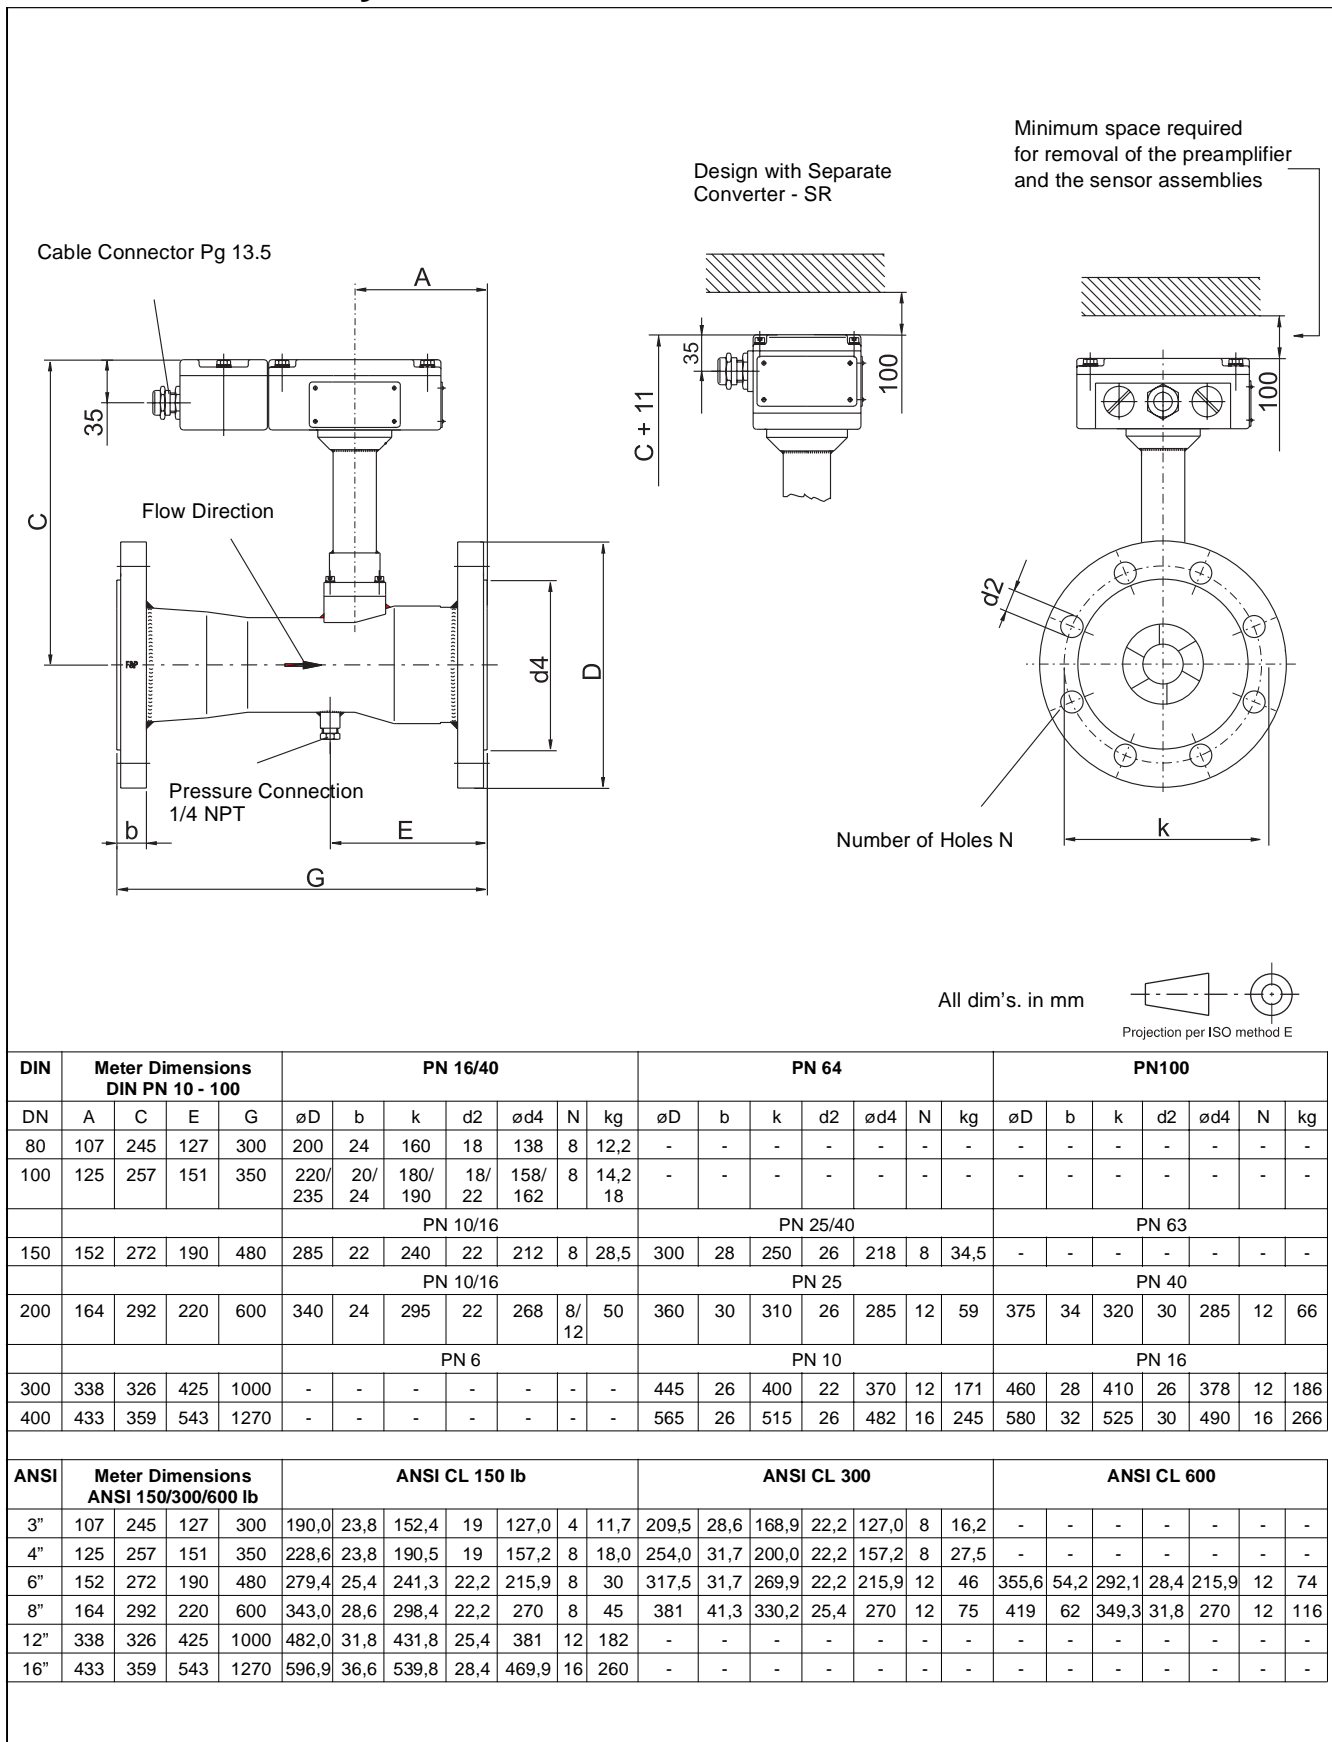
Dimensions, DIN , DN 80 to DN 400; ANSI, 3" to 16"
